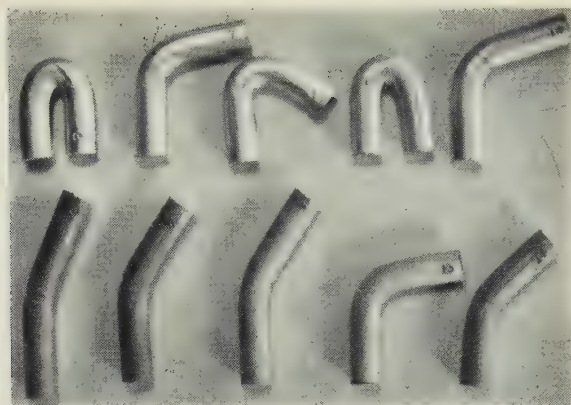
Vice Bends on 0.5-in.-dia. Extruded Rod.
